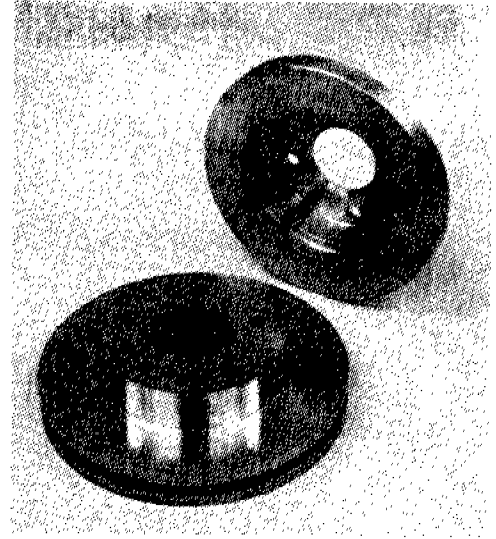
Brake rotors manufactured from 359Al/SiC/20p
